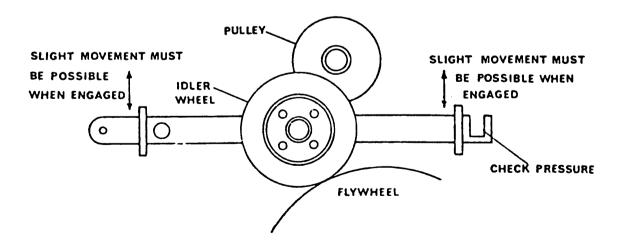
IDLER AND IDLER ARM ASSEMBLY
